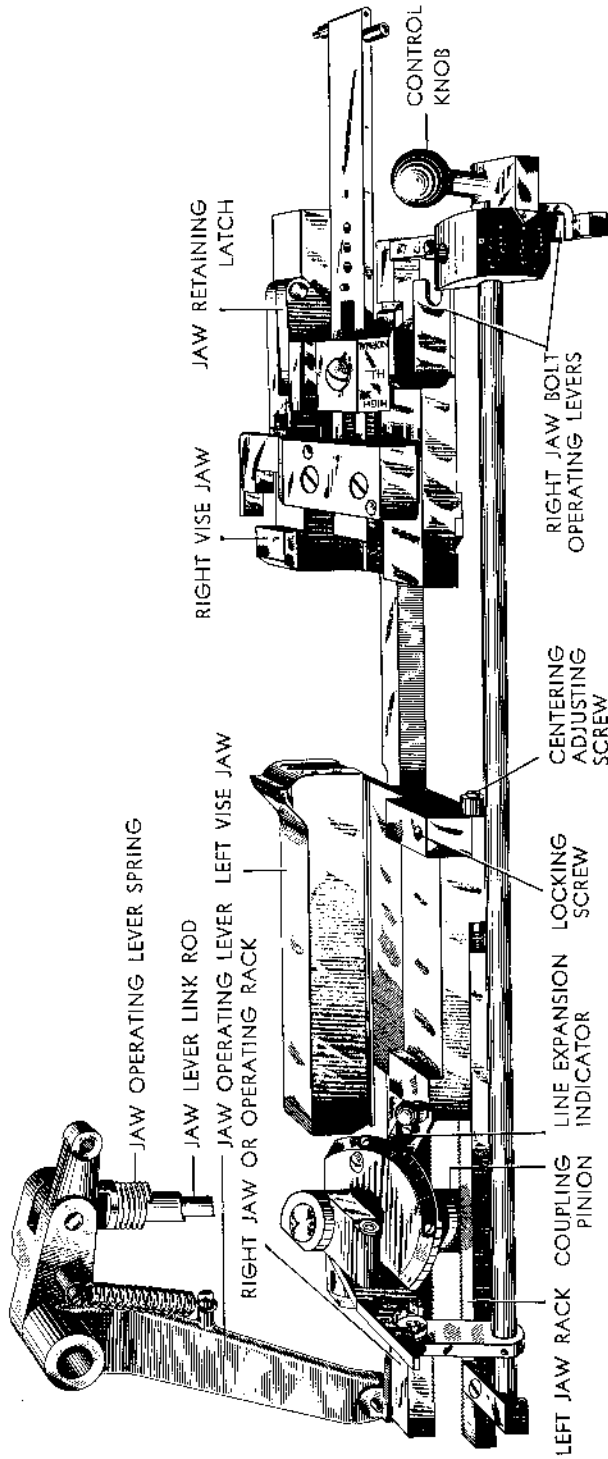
View Showing the Working Parts on the Vise Cap.
